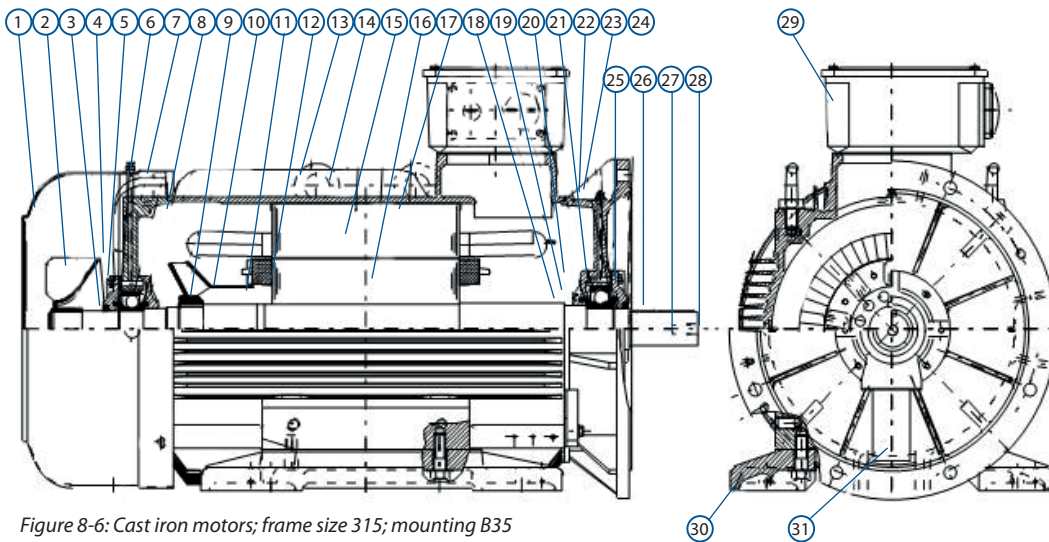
Cast iron motors; frame size 315; mounting B35
